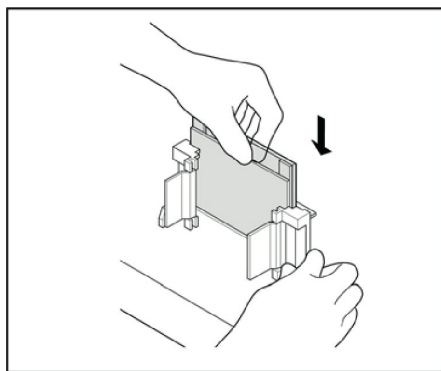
L-VET-MINI4 cell assembly Figure 2: Assembly of the casting frame and casting stand
